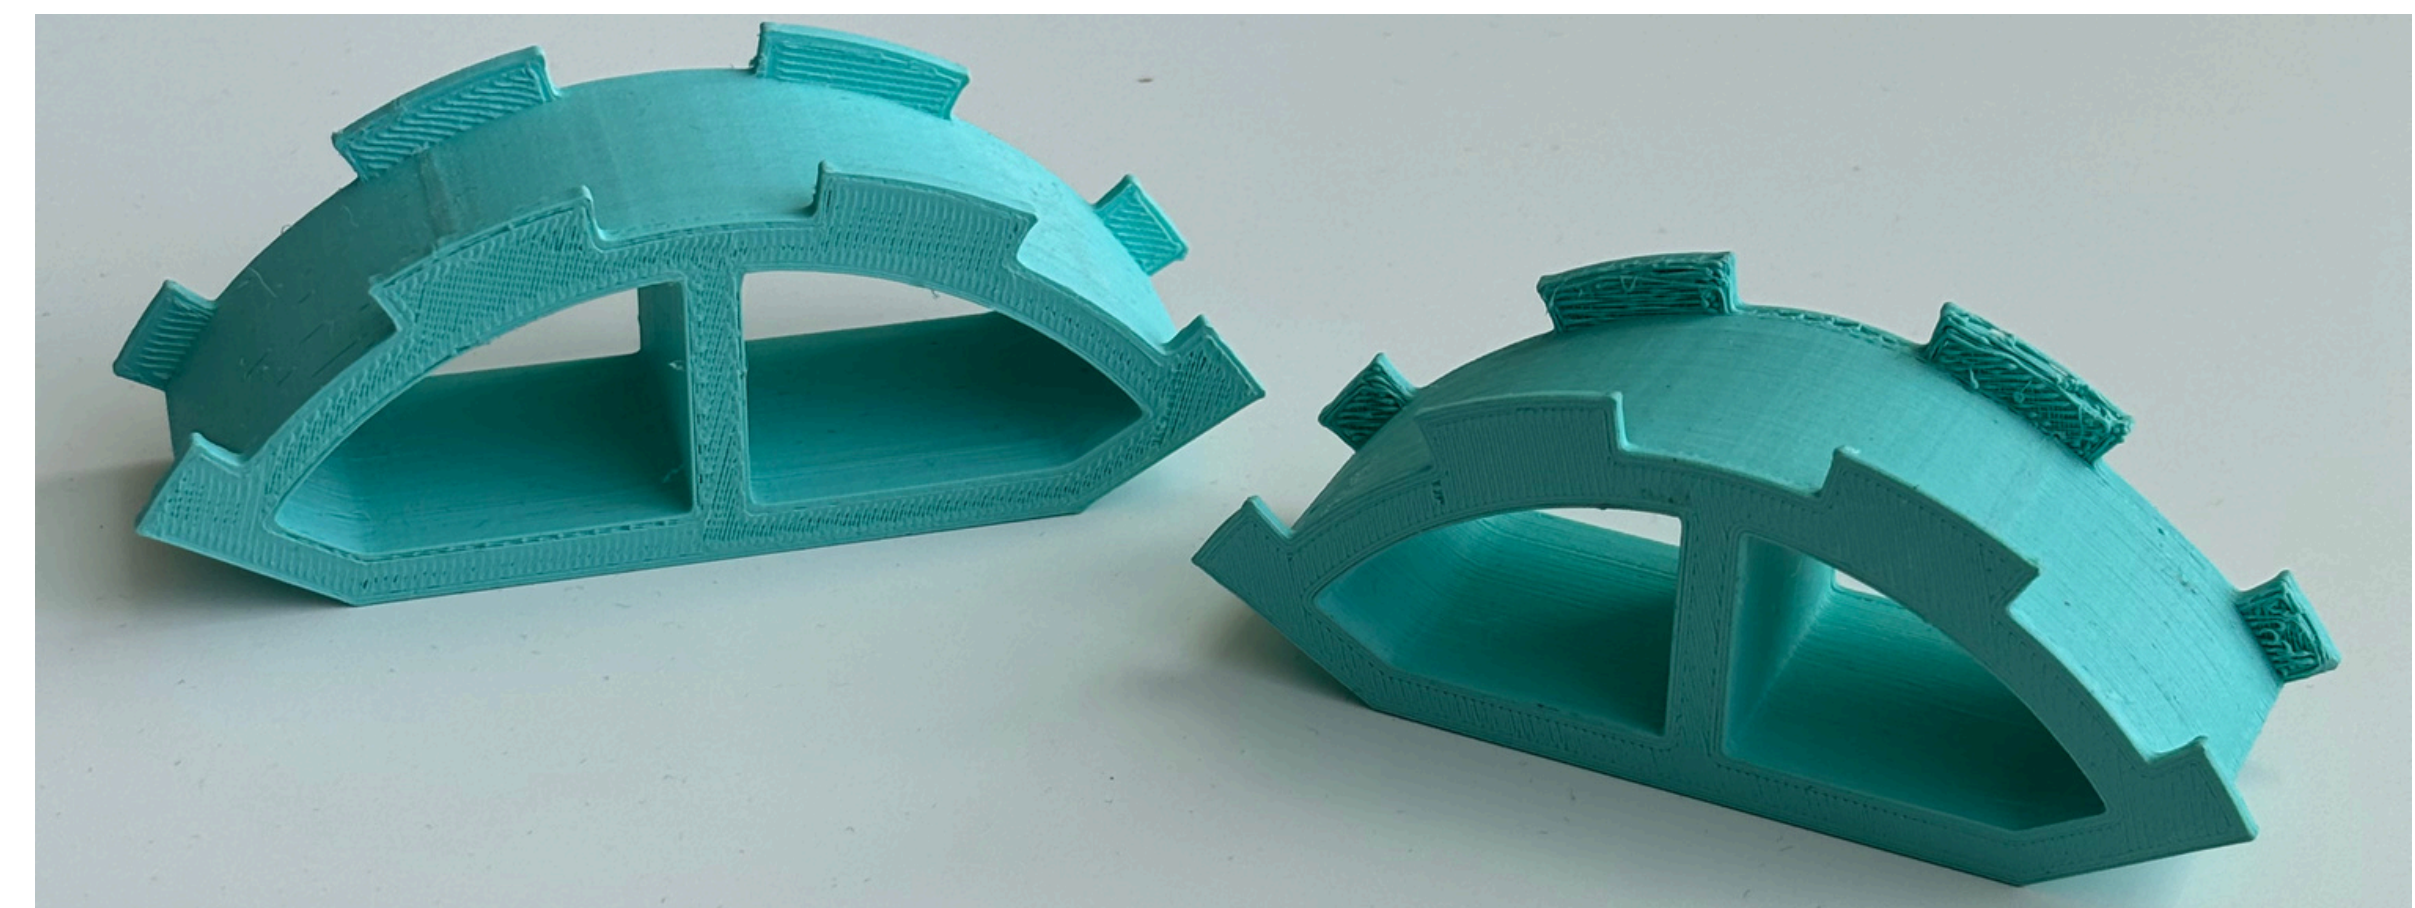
3D printed jigs used to bend the textured strips (*Author, 2024*)
